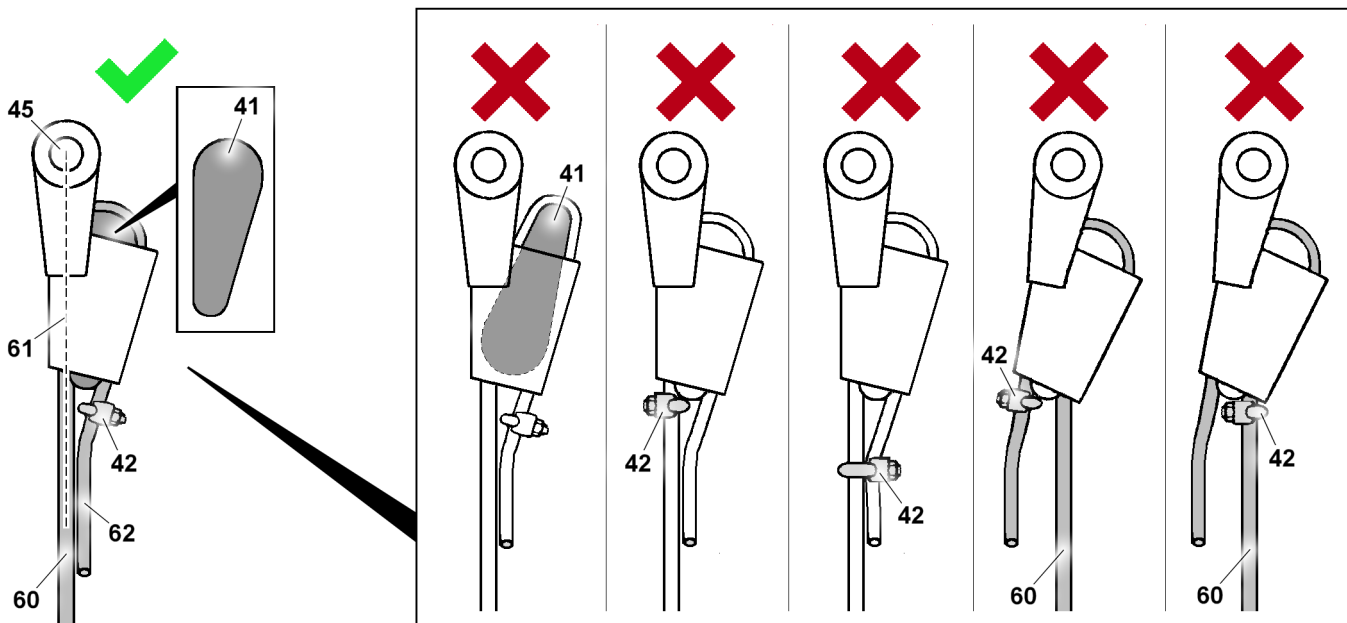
Exemplary illustration with a correctly and incorrectly assembled wedge lock without a bore for a clamp
